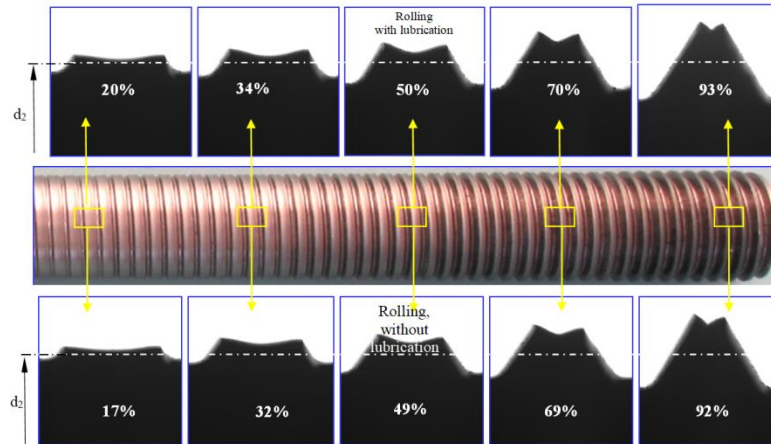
View of the sample with a thread at various stages of the process and axial cross-sections of the thread created as a result of impact on the workpiece of subsequent kneading roller rings, during dry rolling (bottom part) and with lubrication (upper part)
